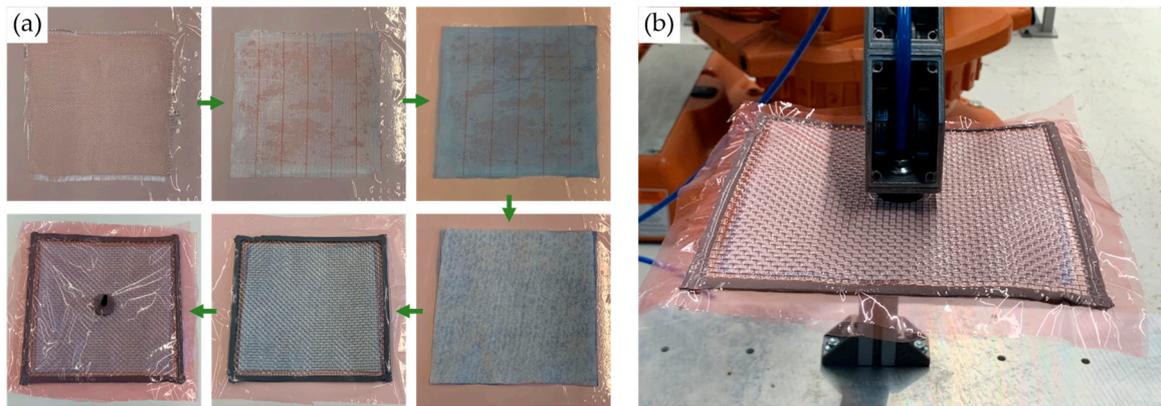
(a) Layup process starting with impregnated glass fiber fabric on bagging film, then adding peel ply, separating foil, breather fleece, wire mesh with vacuum tape on the edges, and bagging film with vacuum connector. (b) Clamped and vacuumed layup before forming.
